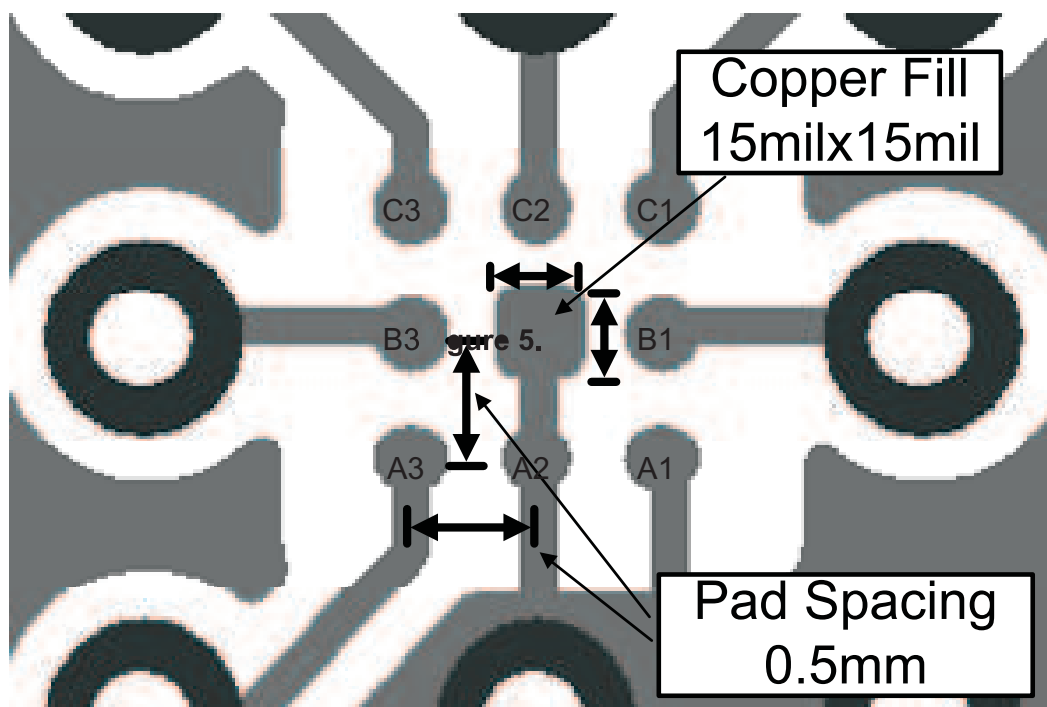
Enlarged View of Layer 1: TMP006 Land Pattern and Copper Fill
